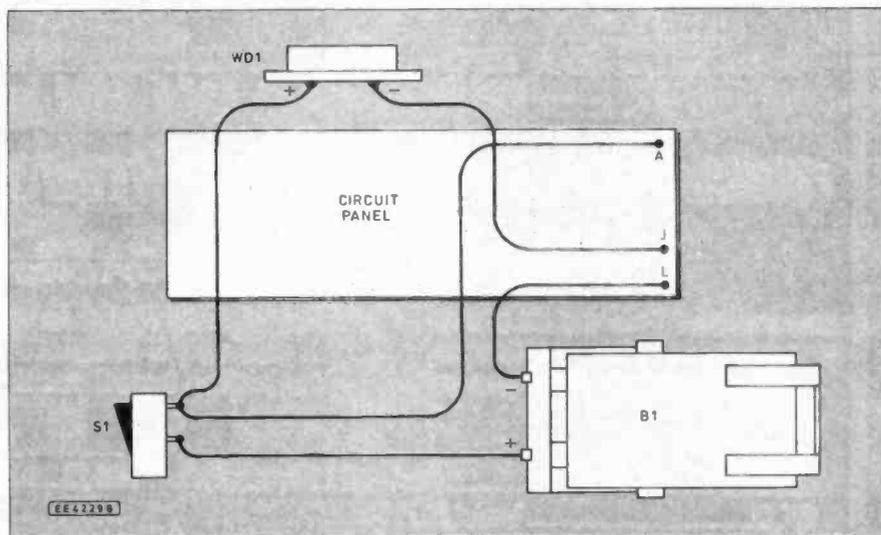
Interwiring from the circuit board to battery holder, switch and warning buzzer.
